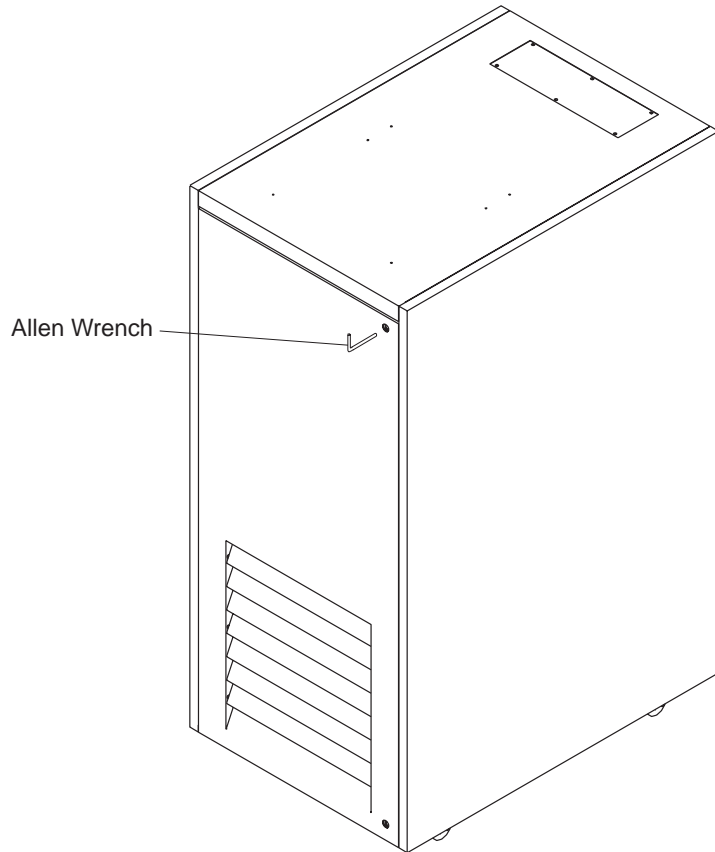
Front, and Rear Door Opening for 29 U Rack
